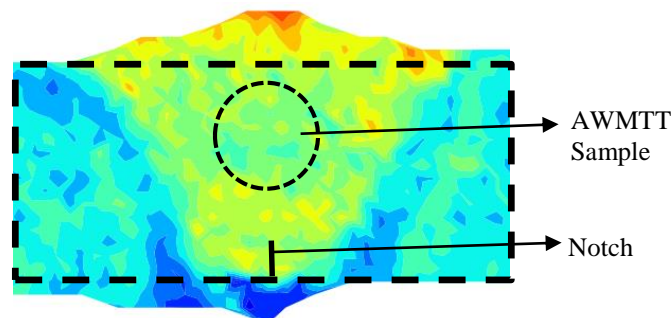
Location of extraction of All weld metal tensile test(AWMTT) sample.
